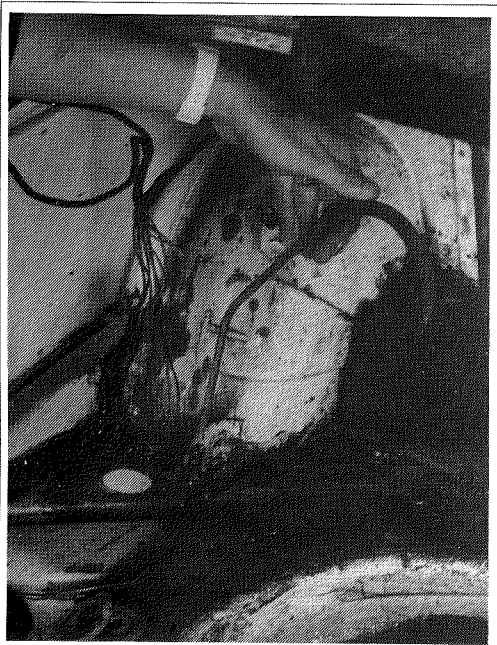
Before lifting the body ensure that all fuel and brake lines, wiring loom and the handbrake cable plus anything else in the way are correctly detached.
